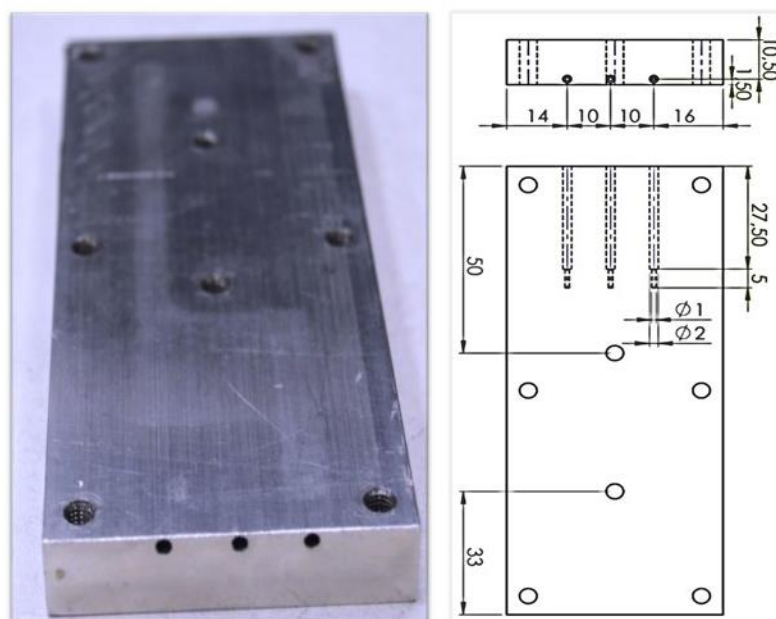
View of the aluminum bottom side and CAD drawing of the thermocouples venues.
